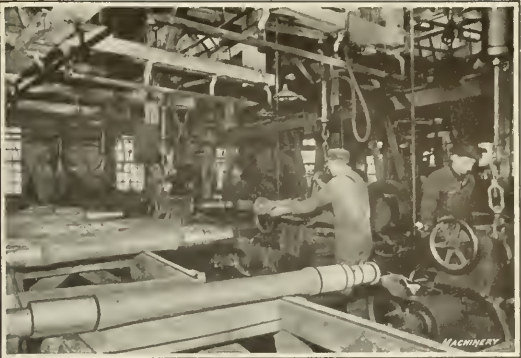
Car axles are too heavy to be handled by one man. This illustration shows a view in the Griffin Wheel Co.'s plant in Chicago, where each axle lathe is equipped with an air cylinder hoist for setting up work and removing it. Turned axles are rolled on rails to the hydraulic wheel press
